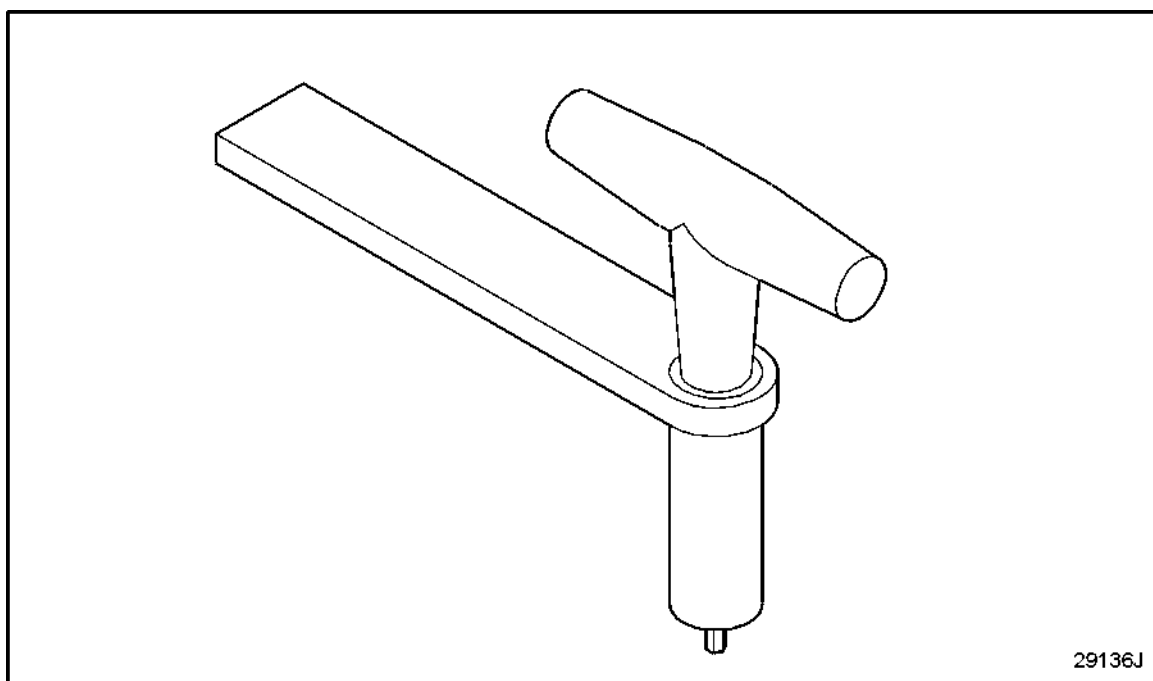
Governor Adjusting Tool (VHSL),J 28598-B
